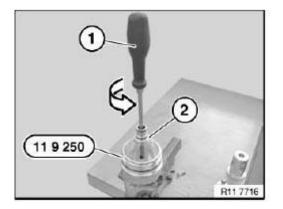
Releasing Insert Using Screwdriver Courtesy of BMW OF NORTH AMERICA, INC.
